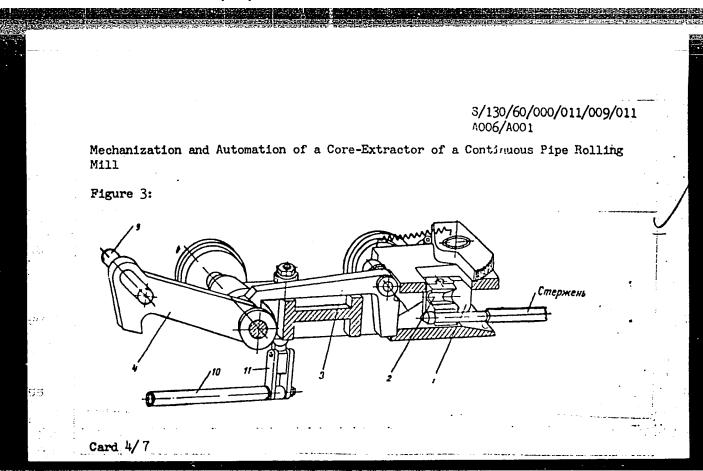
Automatic trolley 1 - tongs; 2 - Jaws; 3 - pawl; 4 - tr traction hook; 5 - lever; 6 - springs; 7 - roller; 8 - roller of the dented section; 9 - rod; 10 - stem; 11 hinge.
